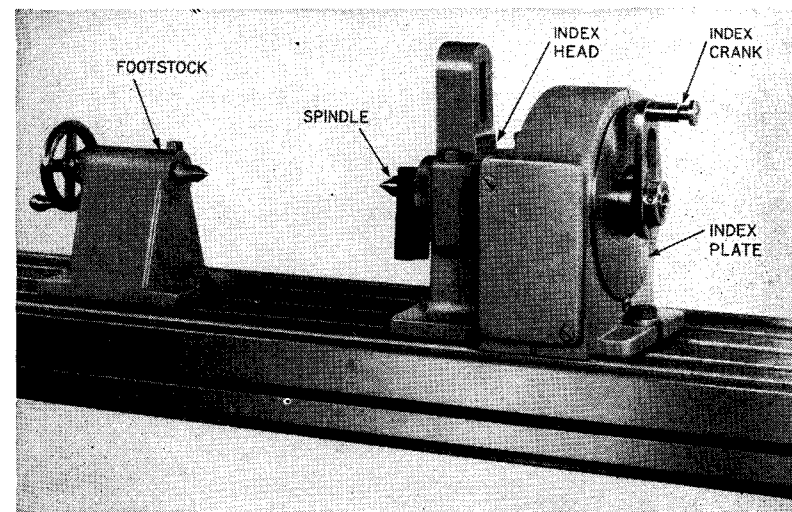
The plain or direct index head, sometimes used when handling a large amount of work which requires indexing on jobs where great accuracy is unnecessary. (The Cincinnati Milling Machine Company)
